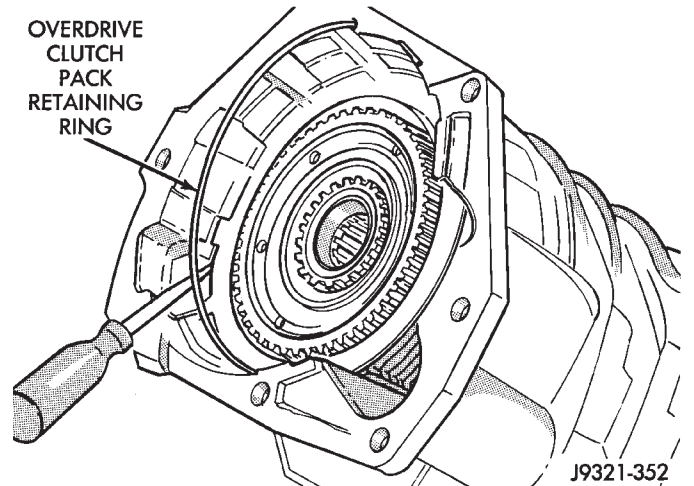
Removing Overdrive Clutch Pack Retaining Ring
